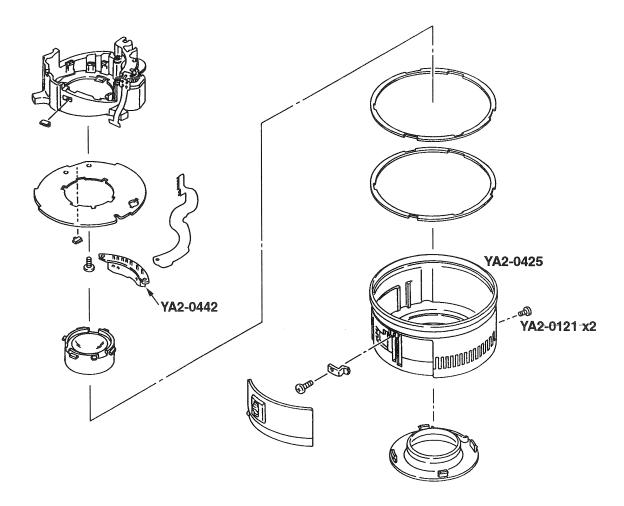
Removing Parts from the EF 50mm 1:1.8II
